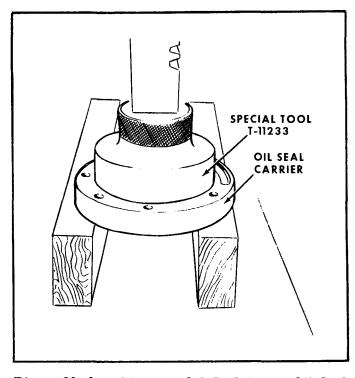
Installing the Oil Seal in the Oil Seal Carrier with Special Tool T-11233.
